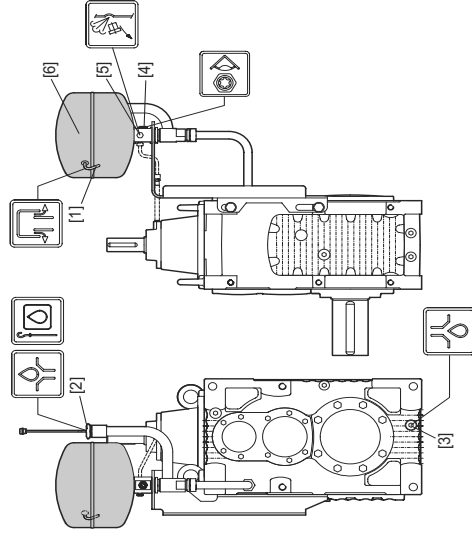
MC.PE../MC.RE... industrial gear units with steel oil expansion tank
